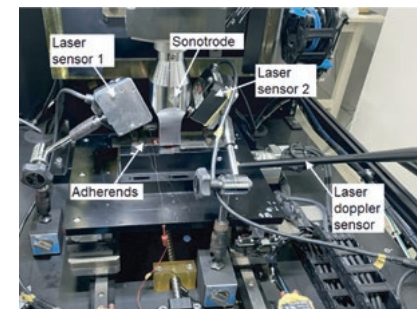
Set-up of ultrasonic welding experiments.
